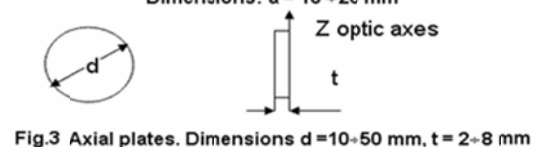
Axial plates. Dimensions d =10-50 mm, t = 2-8 mm
